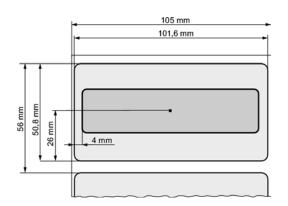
SIMATIC RF630L 6GT2810-2AB01 dimension drawing
